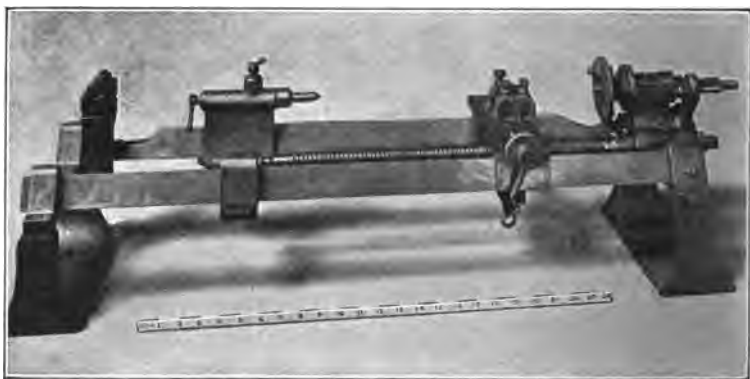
MAUDSLAY'S FIRST SCREW-CUTTING LATHE,
